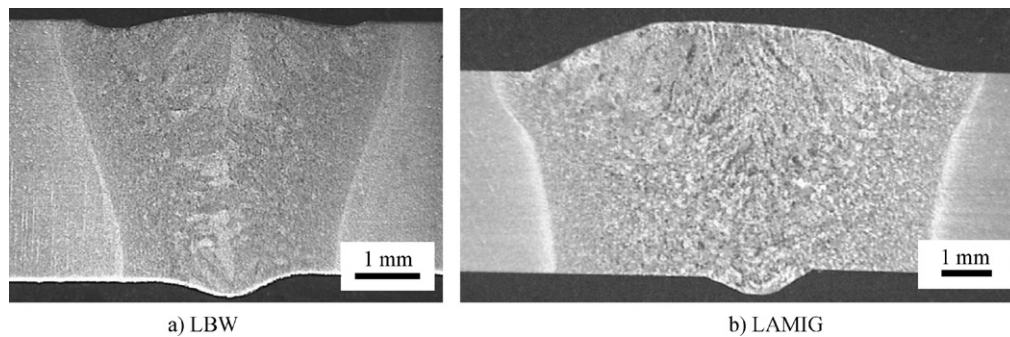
Cross-section profile of LBW and LAMIG welded joints.
